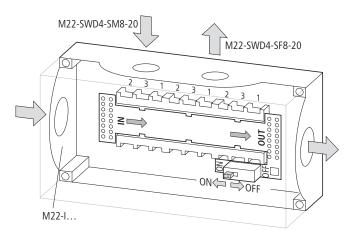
Surface mounting enclosure with PCB M22-SWD-ILP...
